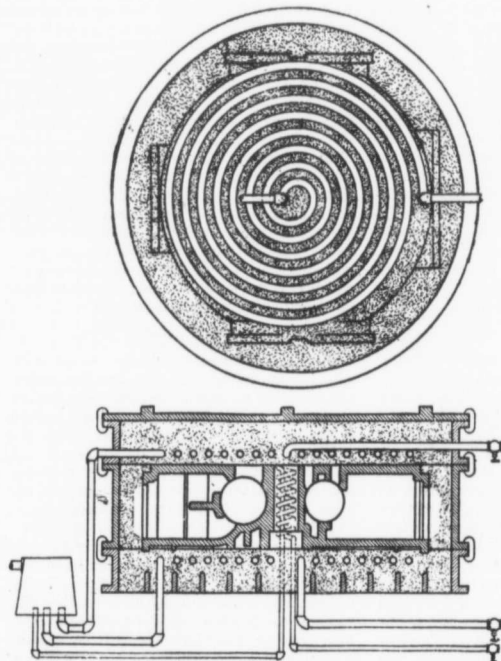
A Cylinder Head Mold Requiring Special Provision for Cooling.
